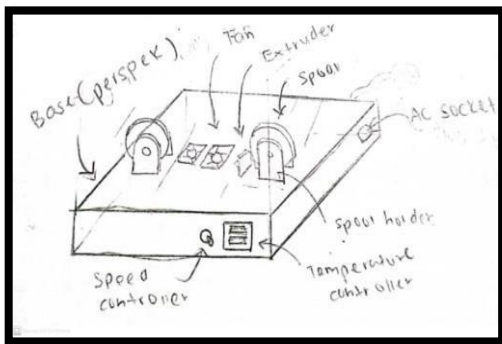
Design 2 (Mechanical parts) for filament extrusion machine
